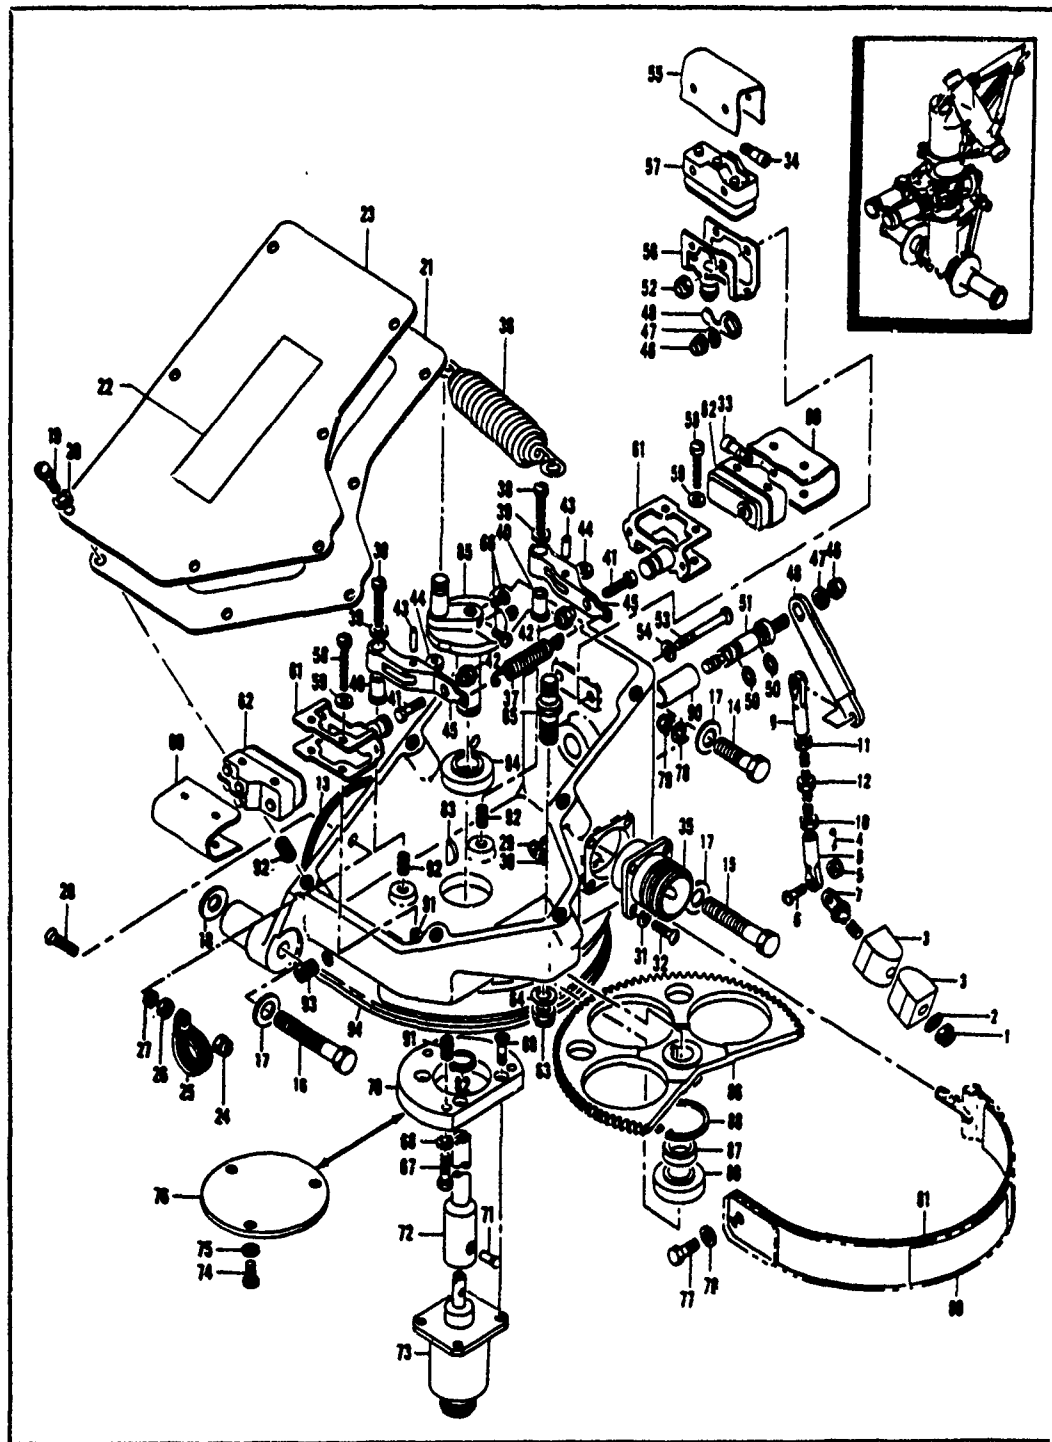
Main Gear Position Control Installations (Sheet 2 of 2)
